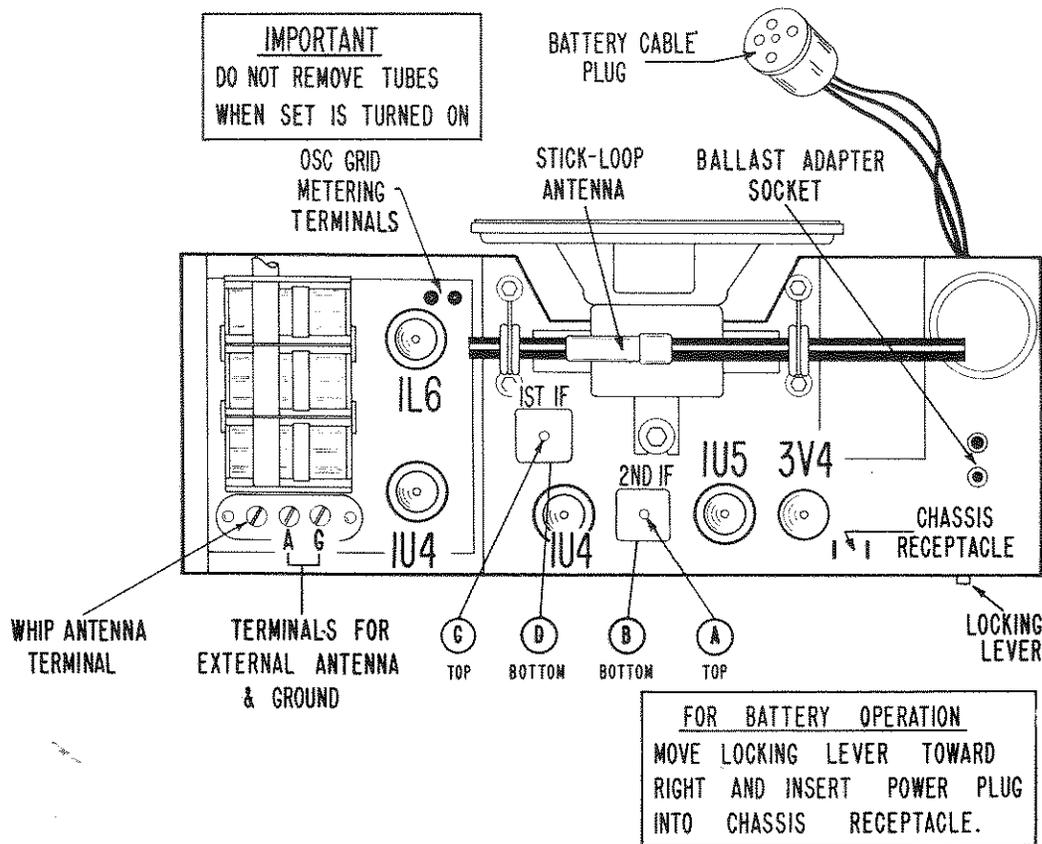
Top View of Chassis Showing Location of Alignment Adjustments and Tubes
